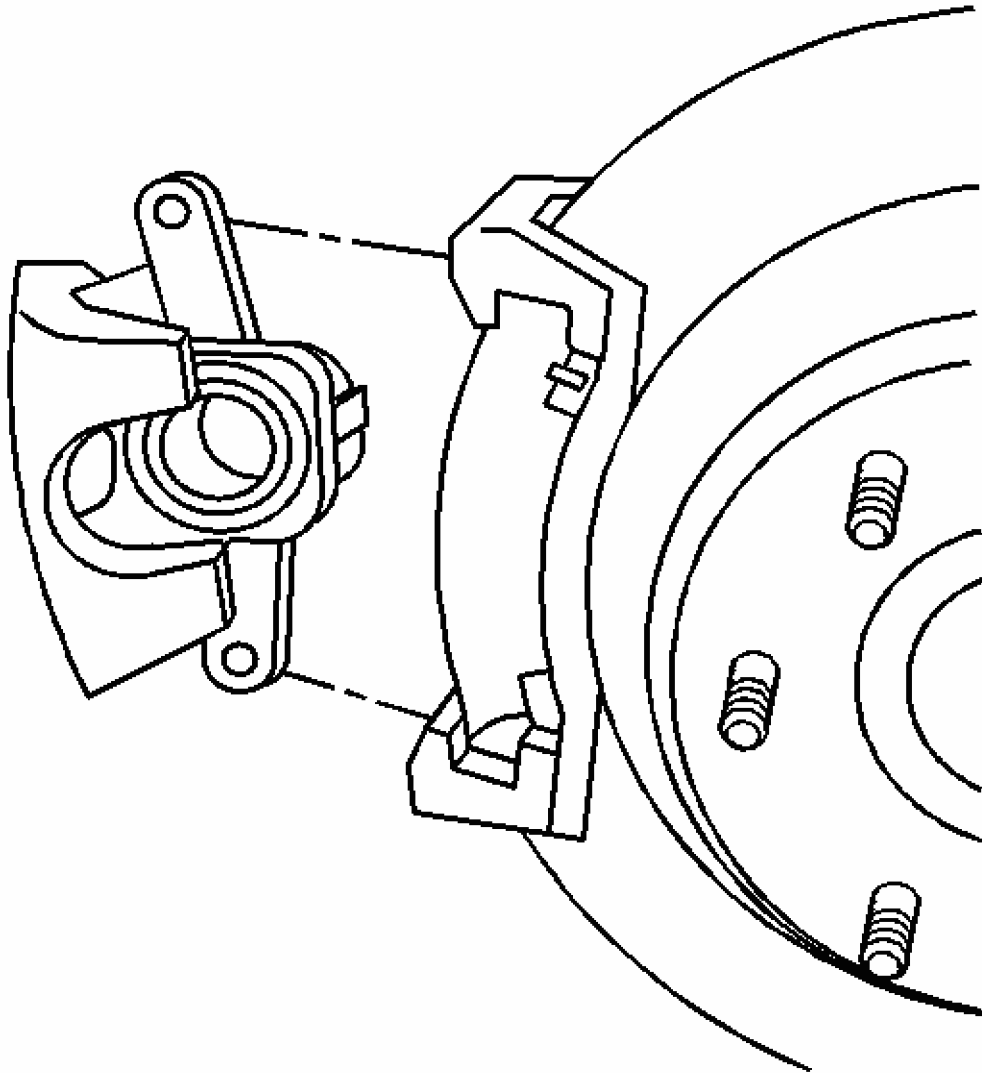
View Of Caliper To Caliper Mounting Bracket
